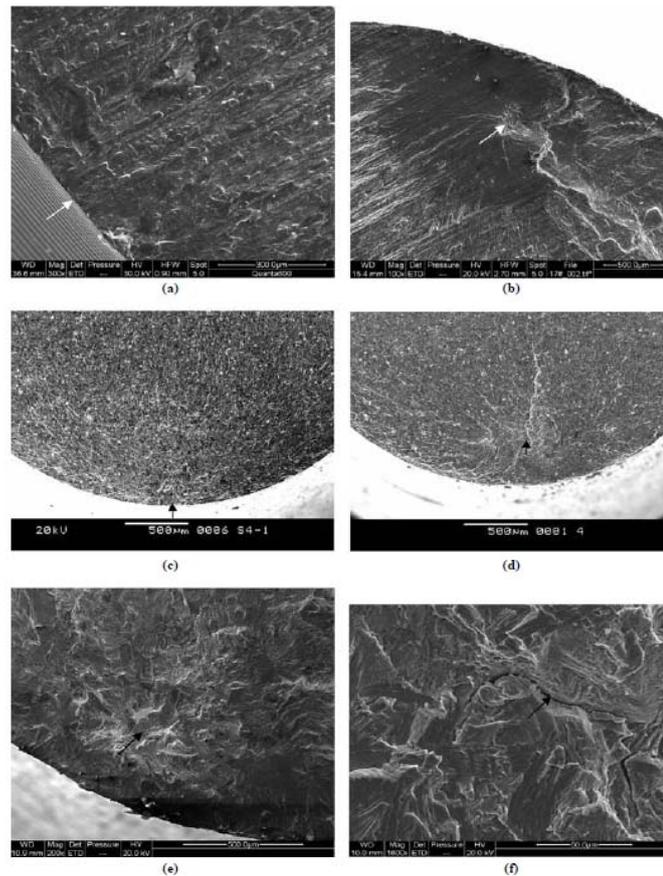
Typical fatigue crack sources (a) Machined specimens of 7050-T7451 aluminum alloy, (b) shot-peened specimens of 7050-T7451 aluminum alloy, (c) machined specimens of Ti60 titanium alloy, (d) shot-peened specimens of Ti60 titanium alloy, (e) shot-peened specimens of TC21 titanium alloy, (f) fatigue cracks in the fatigue crack sources of shot-peened specimens of TC21 titanium alloy
